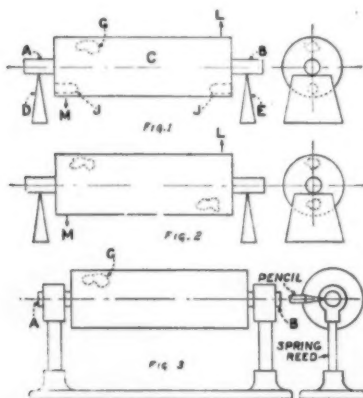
Drawing illustrating static method of balancing. Fig. 2—Note the invisible blowholes. This shaft is balanced statically, but badly out of balance dynamically. Fig. 3—This drawing illustrates the principle of the modern-type dynamic balancing machine.
